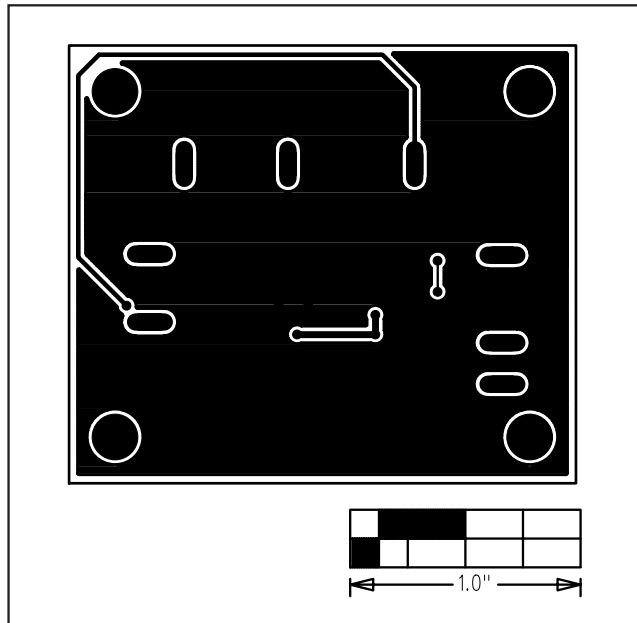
MAX4374 EV Kit PCB Layout—Solder Side
